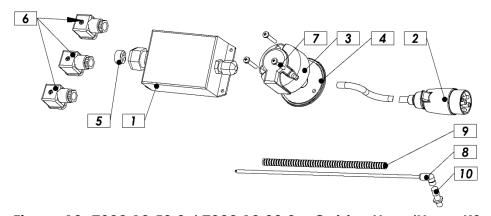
7002.12.50.0 / 7002.12.00.0 – Cables Hpro/Hpro+KS
